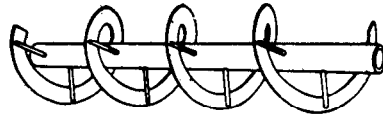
RIBBON FLIGHT SCREW CONVEYOR
